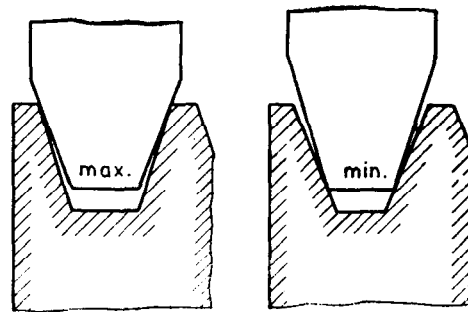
METHOD FOR CHECKING GROOVE ANGLES
